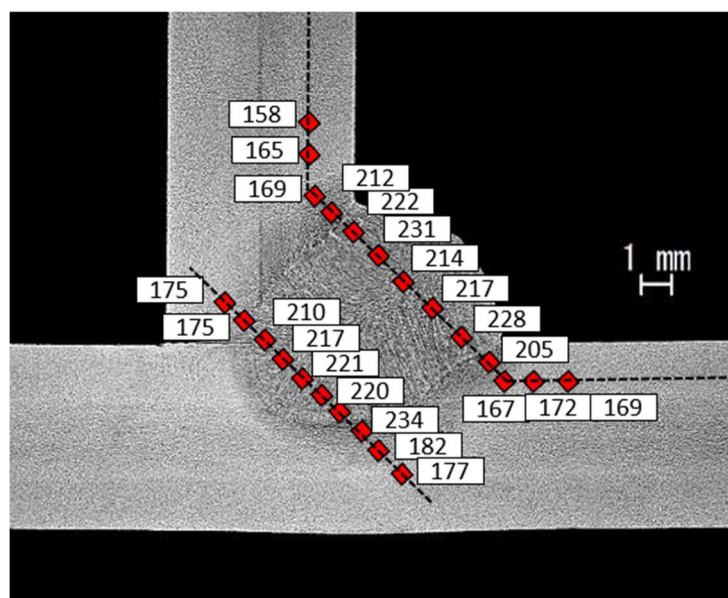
Result of Vickers hardness test for fillet joint by Laser-arc hybrid welding
